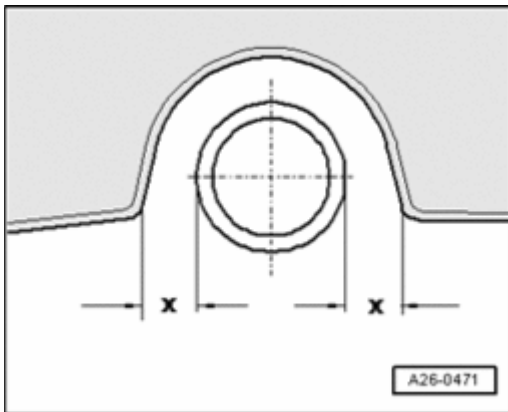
Checking Distance Of End Pipes At Left/Right To Bumper Cover
